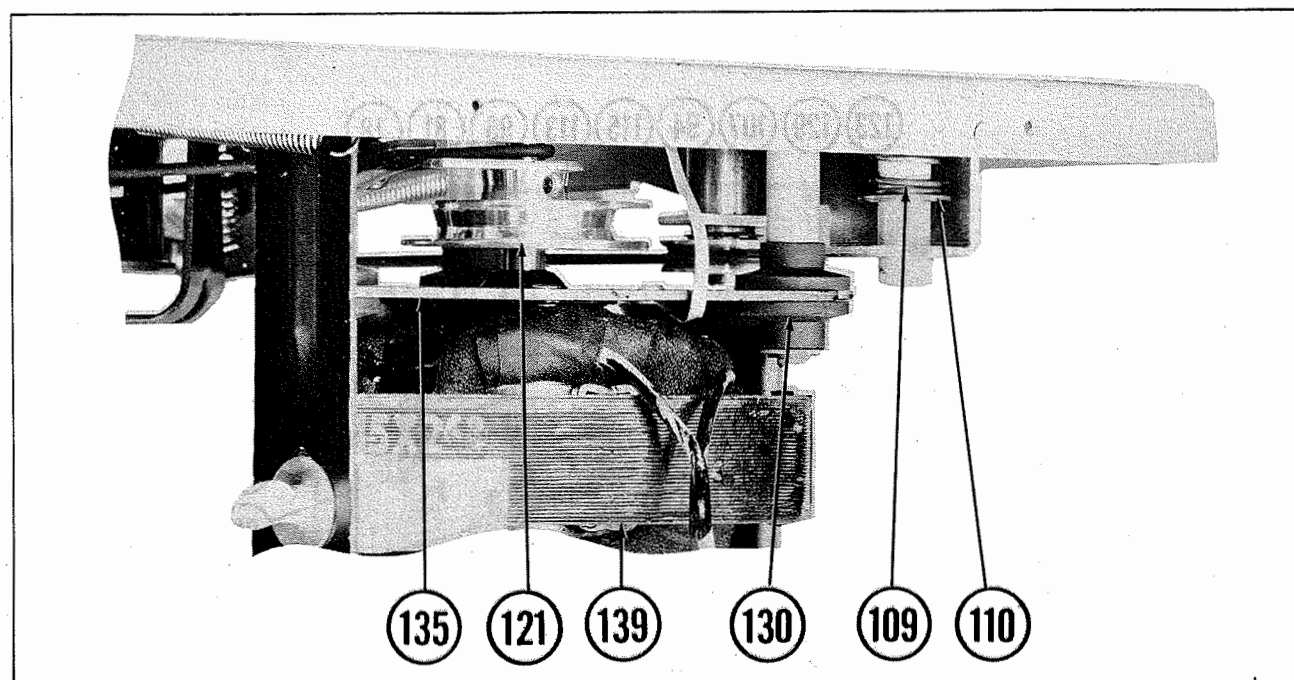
SIDE VIEW OF MOTOR ASSEMBLY
